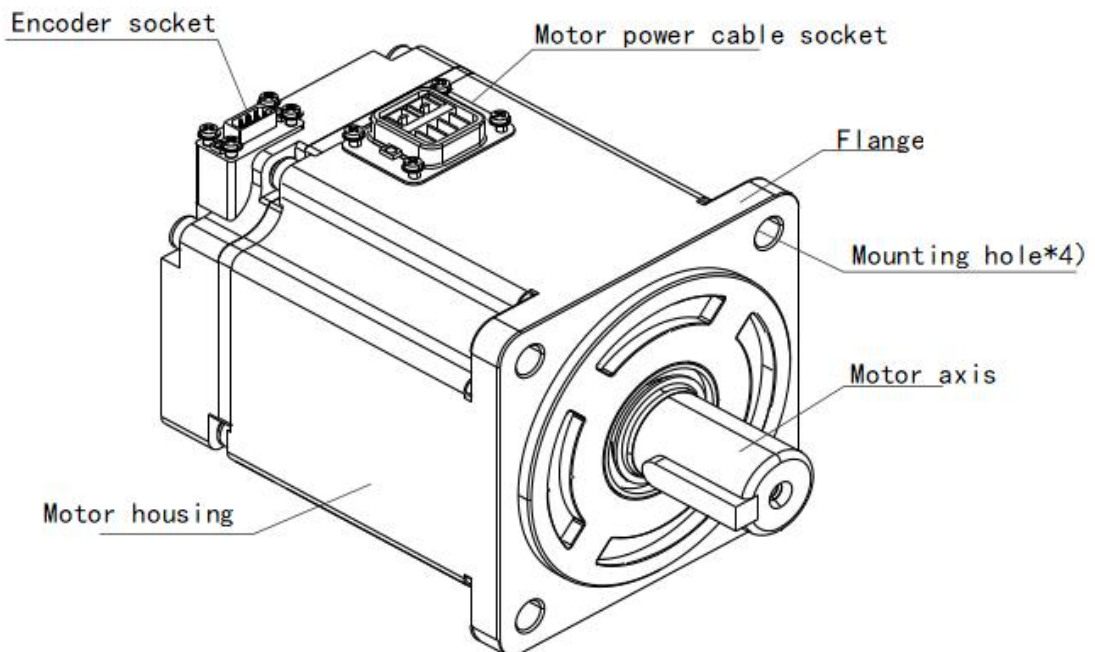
Motor (Connector type) composition of 40/60/80 flange
